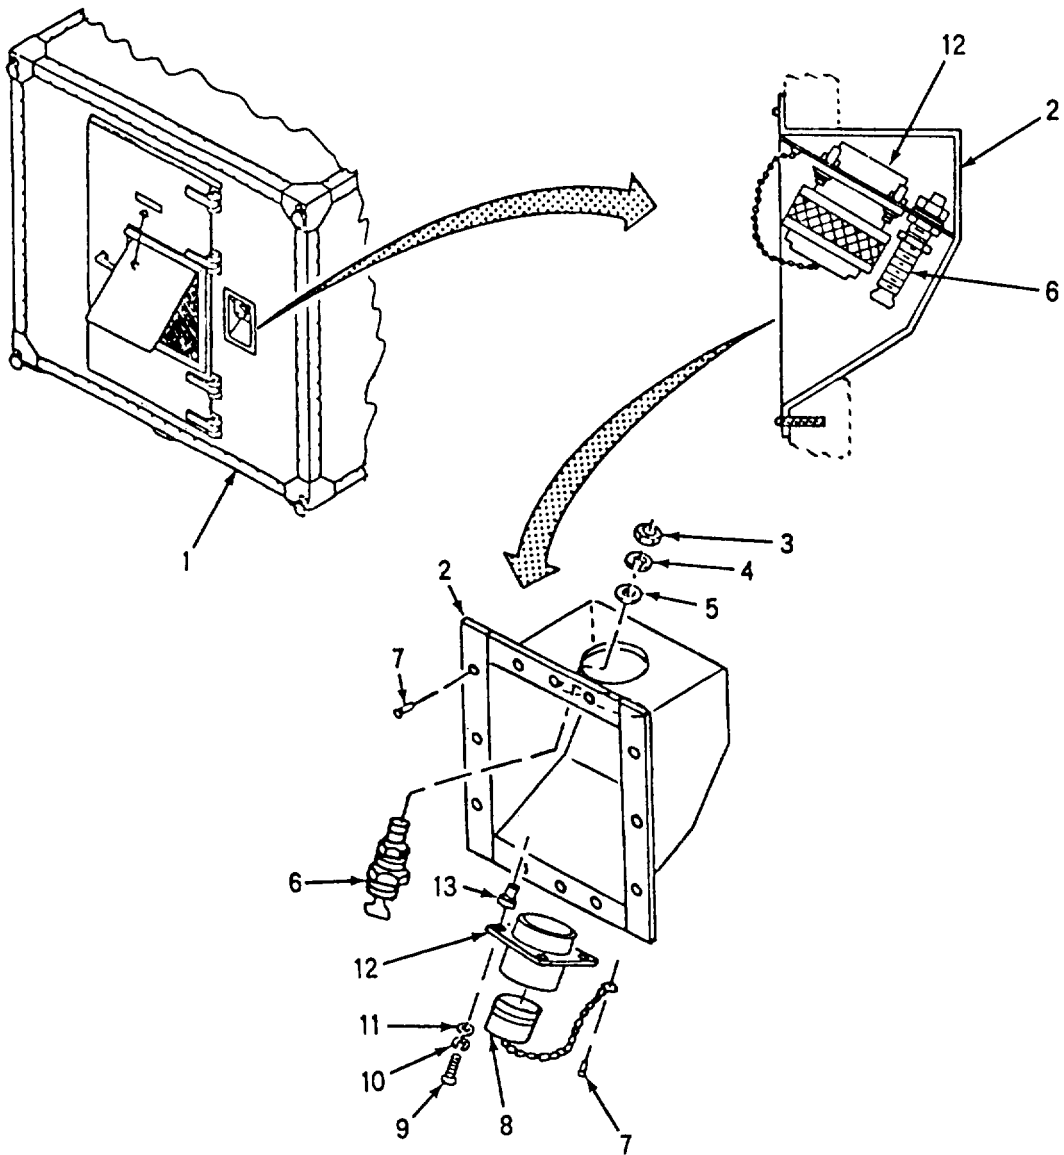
Shelter Assembly (Sheet 1 of 2)
